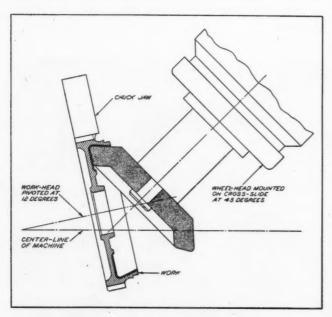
Diagrammatic View of the Grinding Operation Illustrated in Fig. 8
